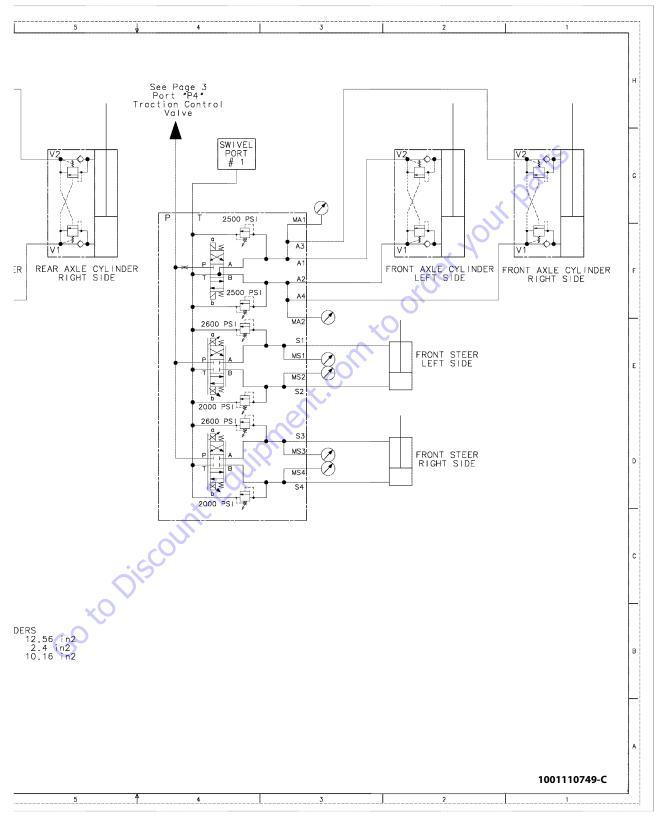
Hydraulic Schematic - Axle/Steer Control - Sheet 2 of 2
